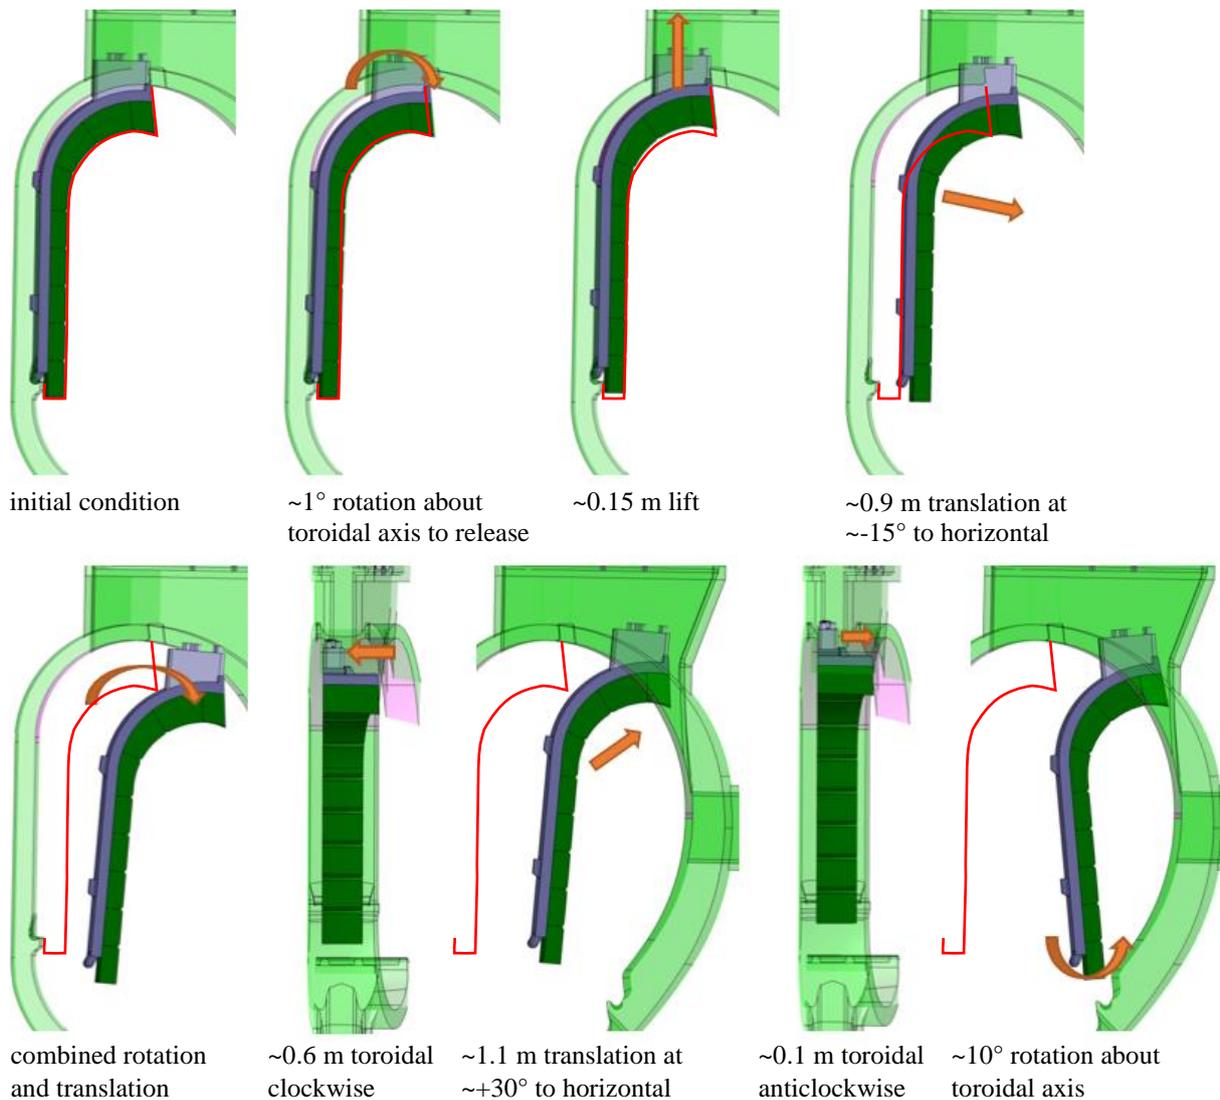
Typical sequence of operations for Inner Breeding Blanket (IBB) removal, with adjacent blanket indicated in red outline
